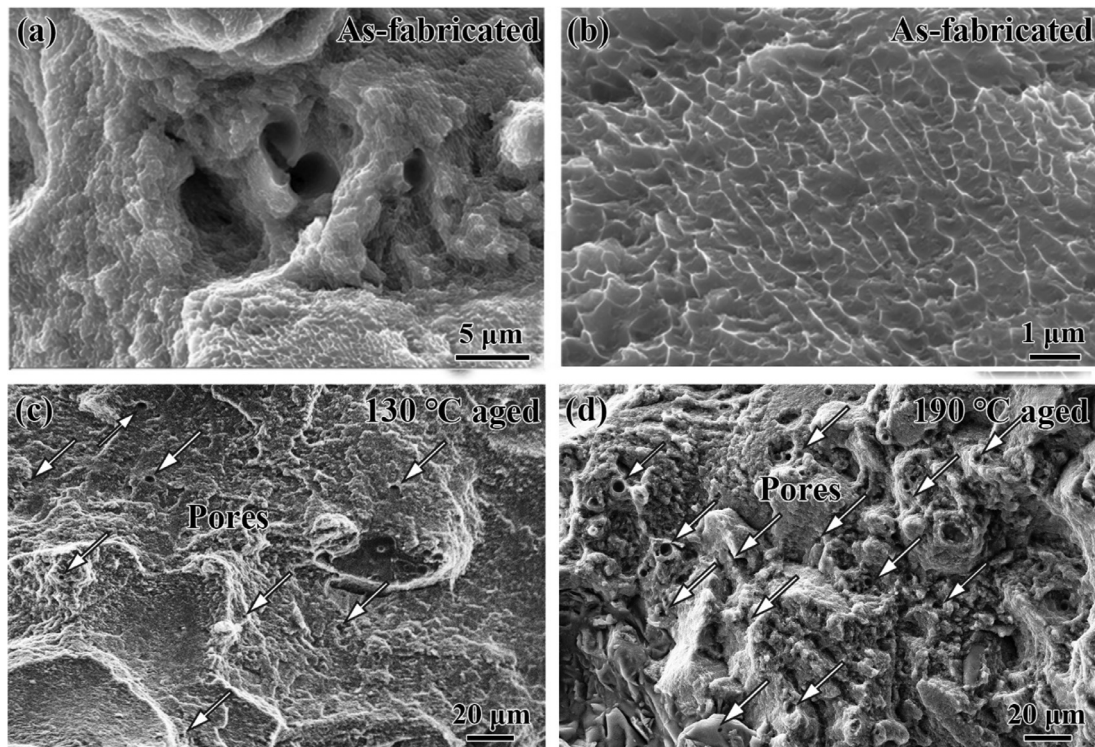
Fracture morphologies of (a, b) as-fabricated samples and (c, d) aged samples, the arrows indicate pores observed on the fracture surface.
